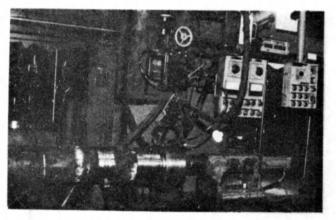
SET UP FOR CYLINDER WELDING
